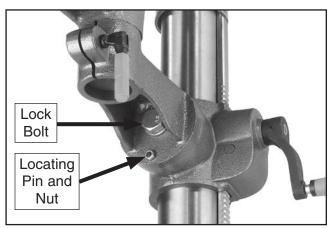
Table tilt locating pin and nut and lock bolt for angle adjustment (G7946).
